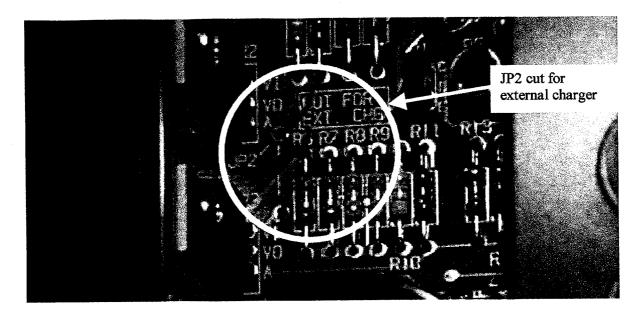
The AFP-200 printed circuit board instructions to cut JP2.
